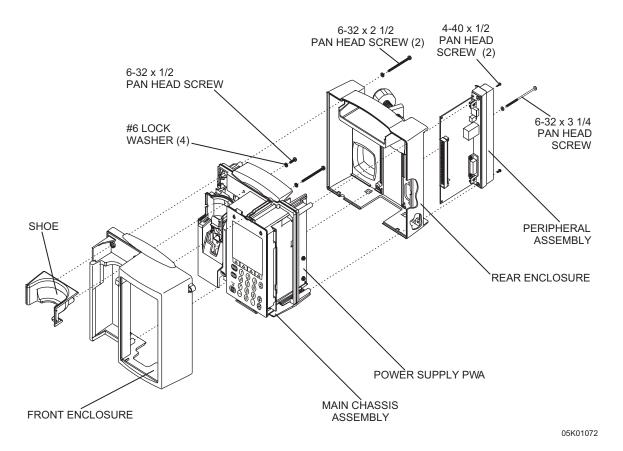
Separating the Front Enclosure, Main Chassis, and Rear Enclosure
